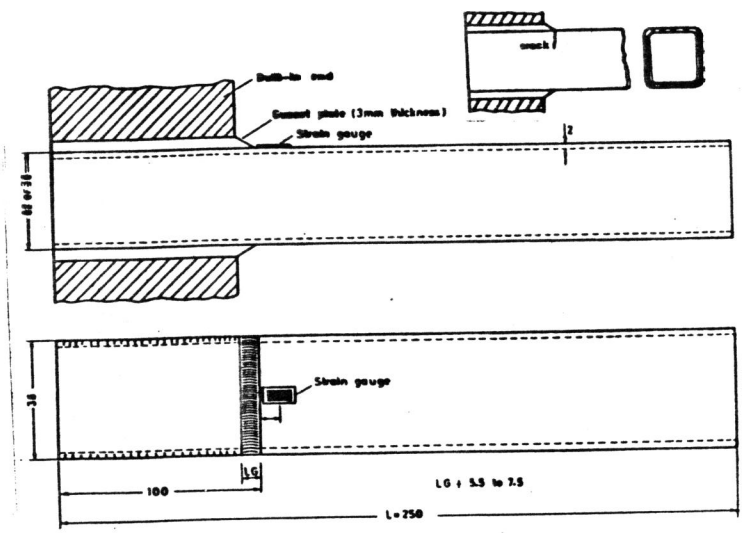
Tubular specimen with a fillet welded gusset plate used in the experimental programme
